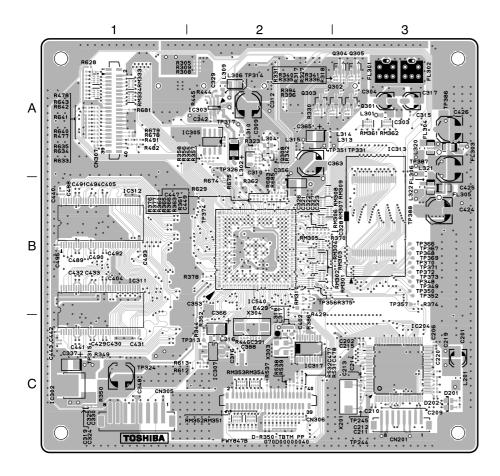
EU01 Digital PC Board (Top side)
